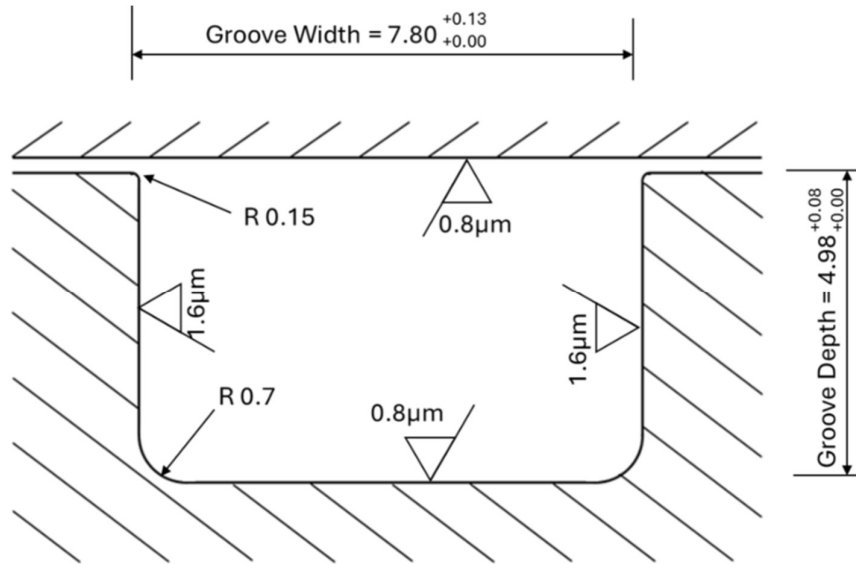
Spiral casing mandoor 6mm O-ring groove
